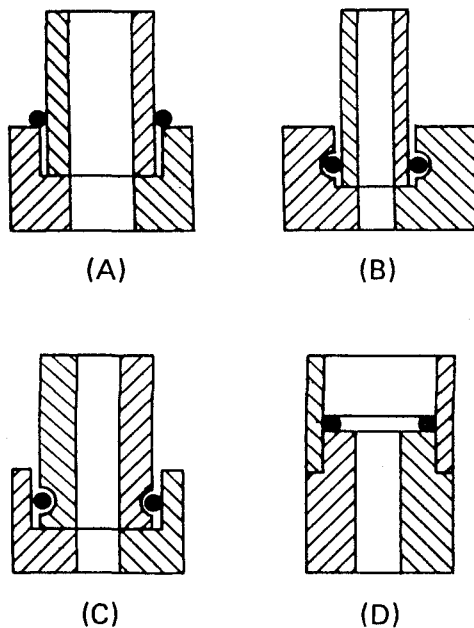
Methods of Preplacing Brazing Filler Wire
